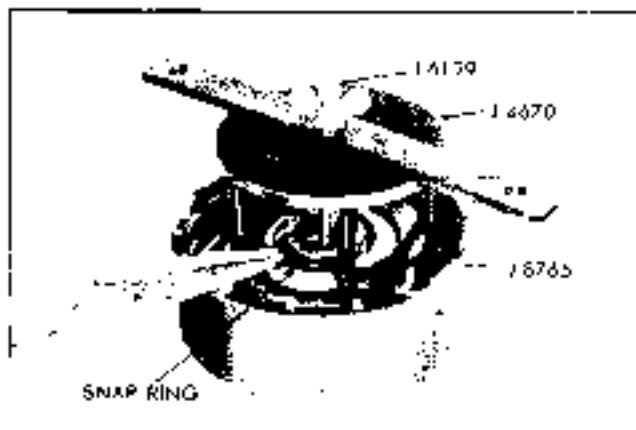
E-92 Removing Direct Clutch Sprag Ring
